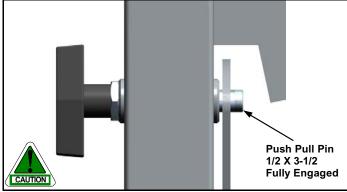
Caution: Check that the two Push Pull Pins 1/2 X 3-1/2 (#5t located on the Press Bar Selector Housing (#23), and the High-Lou Carriage (#14), also the Push Pull Pins 1/2 X 5-5/8 (#58) located on th and the Front Upright (#6) are fully engaged into the selected holes of th Press Bar (#23), High-Low Selectorized Upright (#13), and the Bac Pad Bracket (#7).
